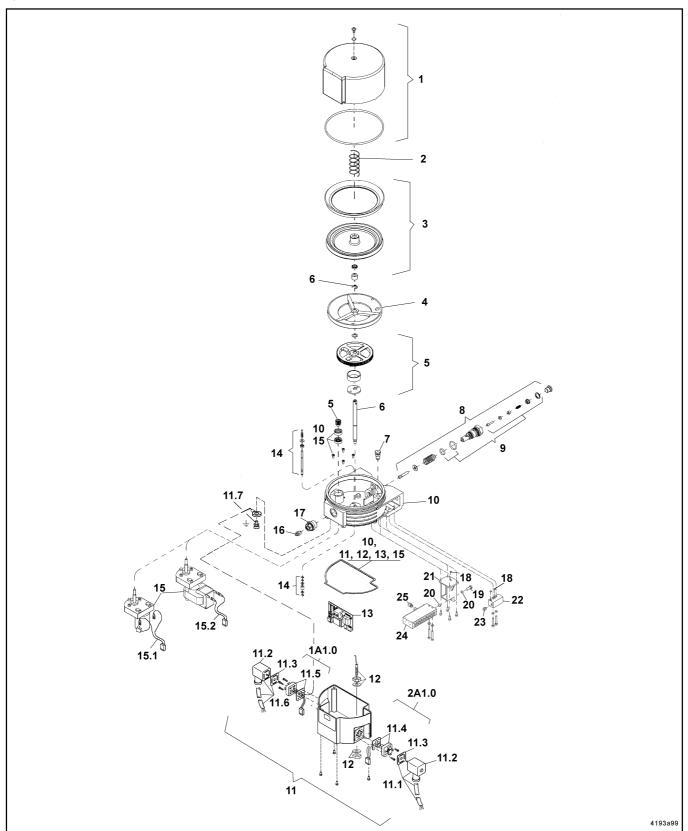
QLS 301 with bottom mounted SSV Divider Block
